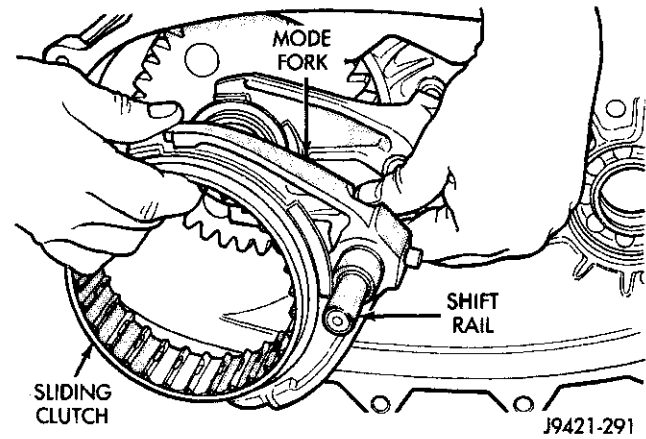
Mode Fork, Shift Rail And Sliding Clutch Removal
